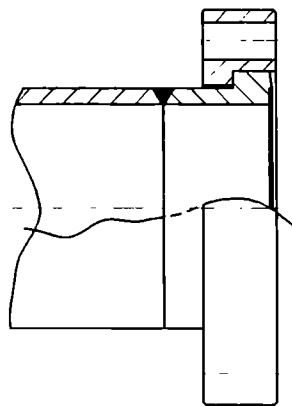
Butt weld attachment with rotatable vacuum flange
